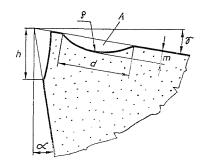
Characteristic wear of the tool in perpendicular section on main edge (h - flank wear) d — width of crater, m — depth of crater, A — area of crater section, ϱ — radius of crater section, γ — rake angle, α — clearance angle)
